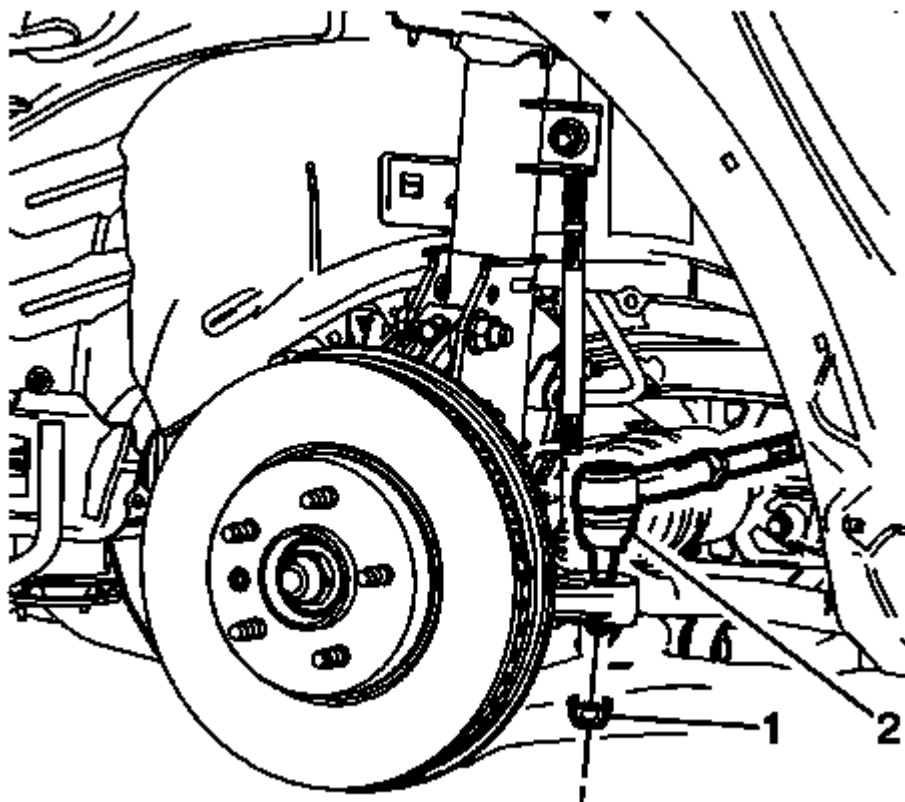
Steering Linkage Outer Tie Rod Nut And Tie Rod
